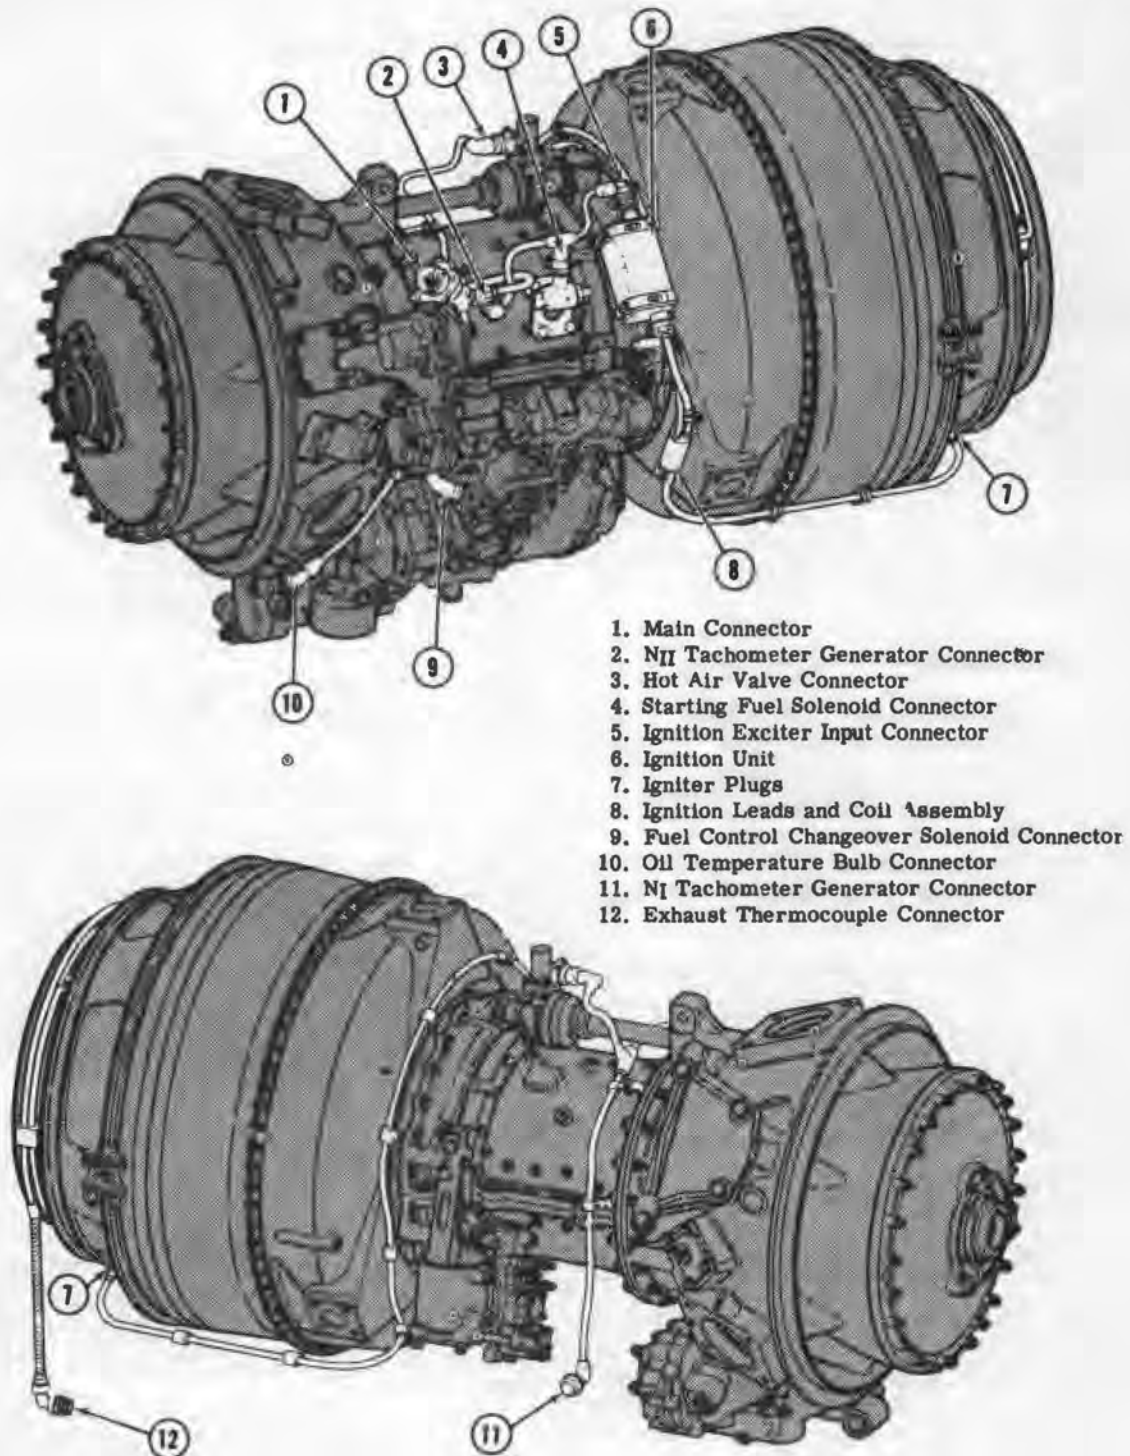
Engine electrical harness and units — T53-L-1A engine
